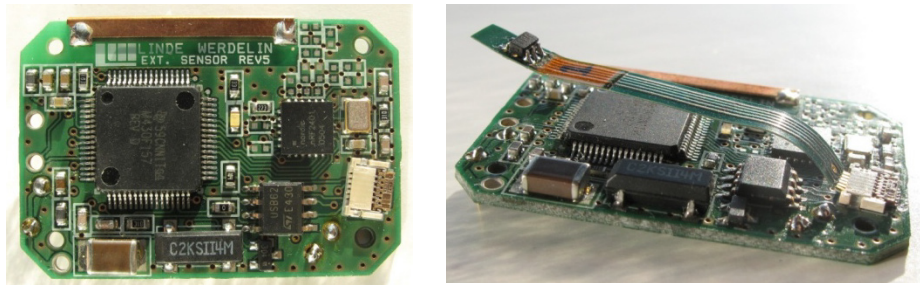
The PCB is shown without and with the flex print inserted in the connection terminal
